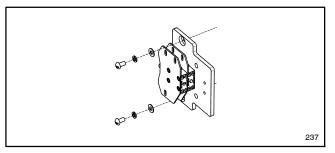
Coil Control Contact Kit (with mounting hardware)
